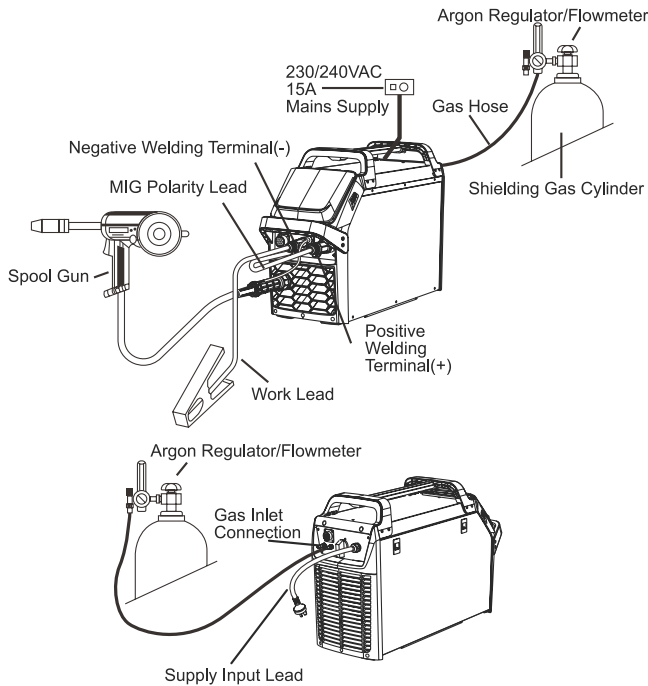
Setup with Spool Gun for Gas Shielded MIG Wire
